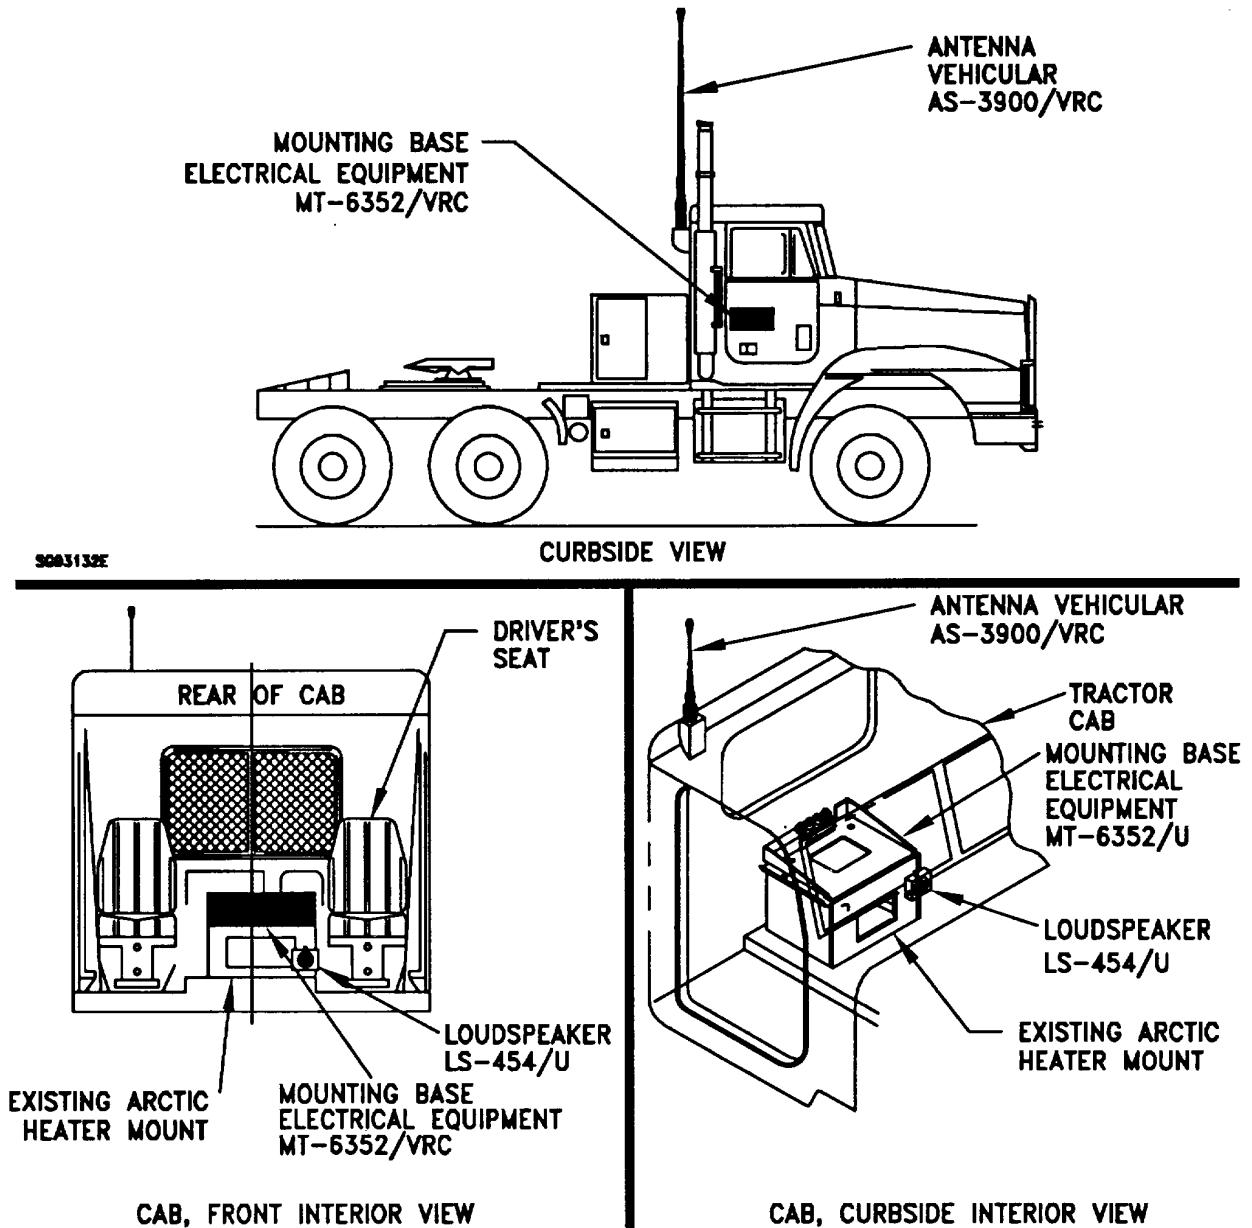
(1). MK and Radio Installation: MK Equipment Locations
